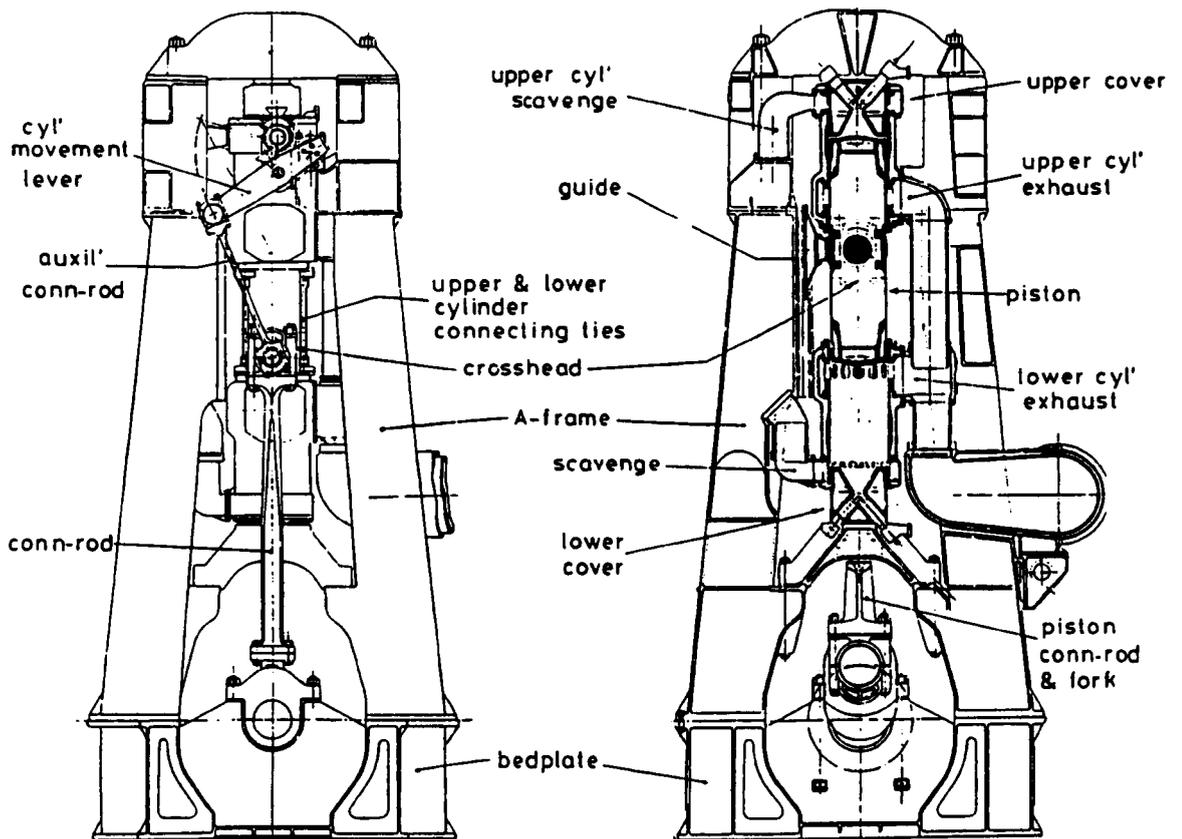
b.6 Transverse Views of Sliding Cylinder Engine
